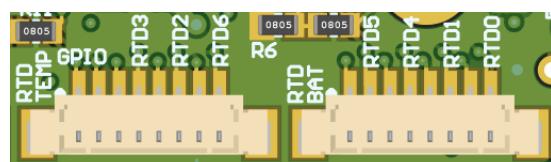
RTDs PicoBlade connectors on the PCB.
